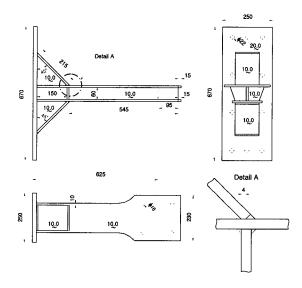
Shape and size of specimen of weldment of hopper corner structure(Unit: mm)
